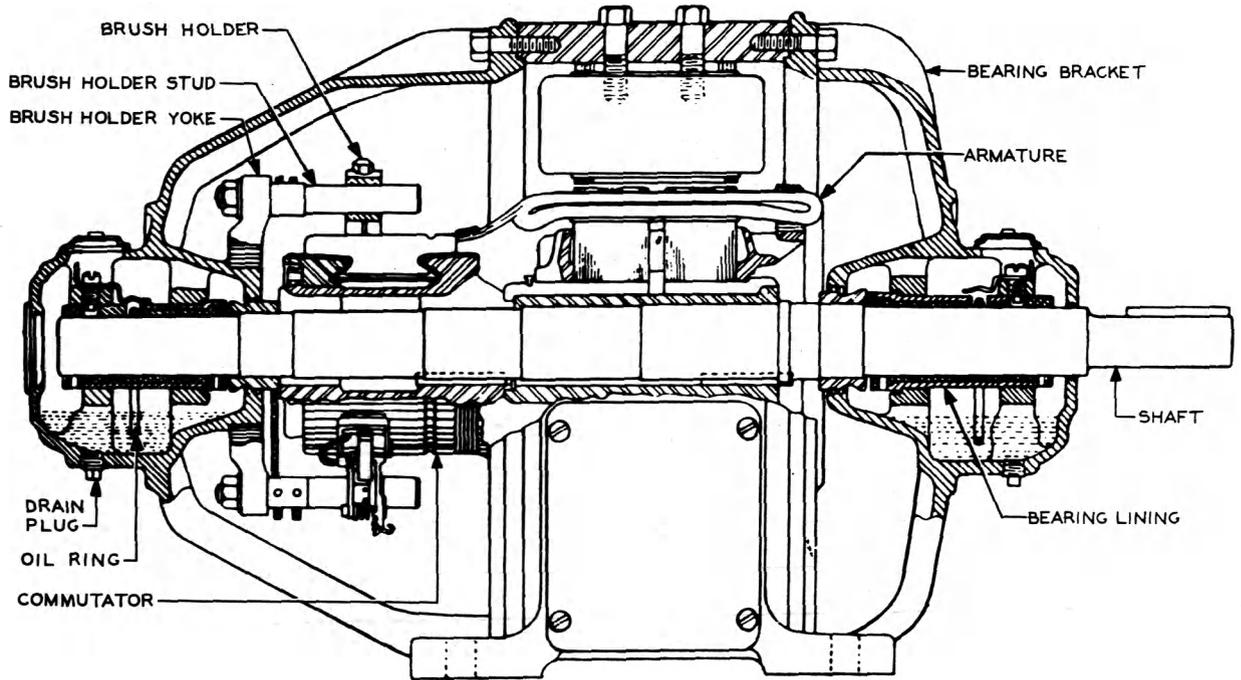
Sectional View of Motor With Oil Ring Type Bearings
